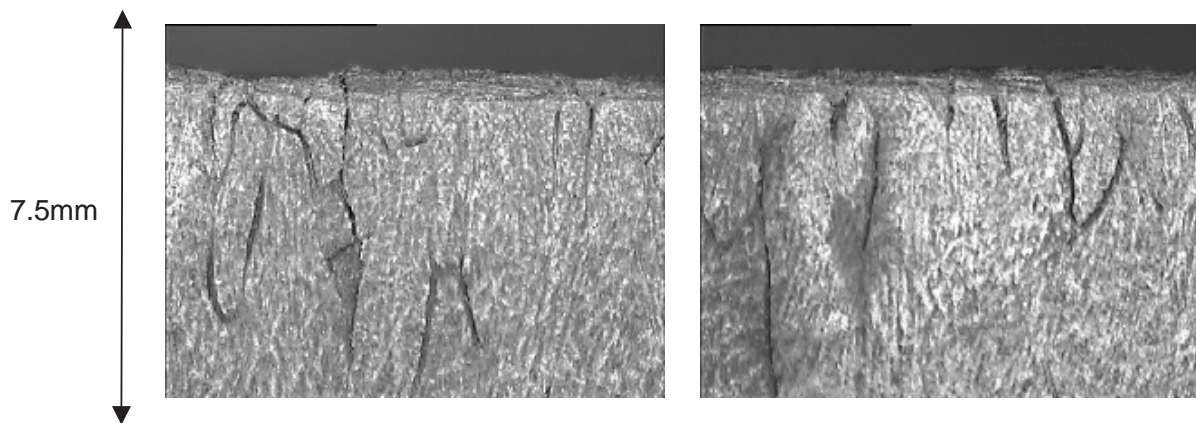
Cross-section of crack, cast 60933, slab 6B, samples 3 and 4
